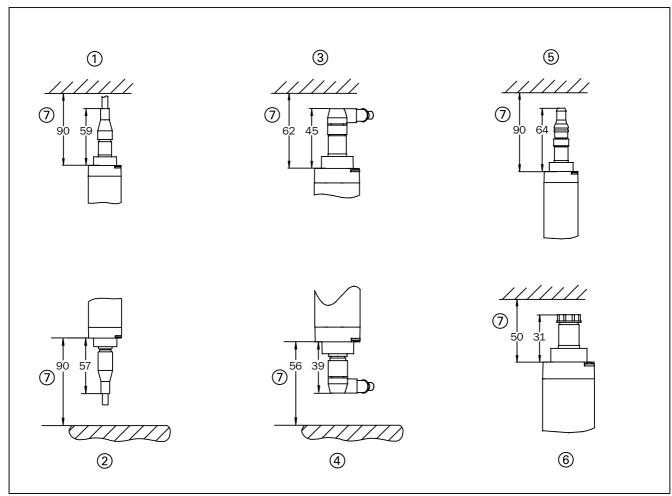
Dimensional drawings and mechanical detail of the connectors for the small housing
